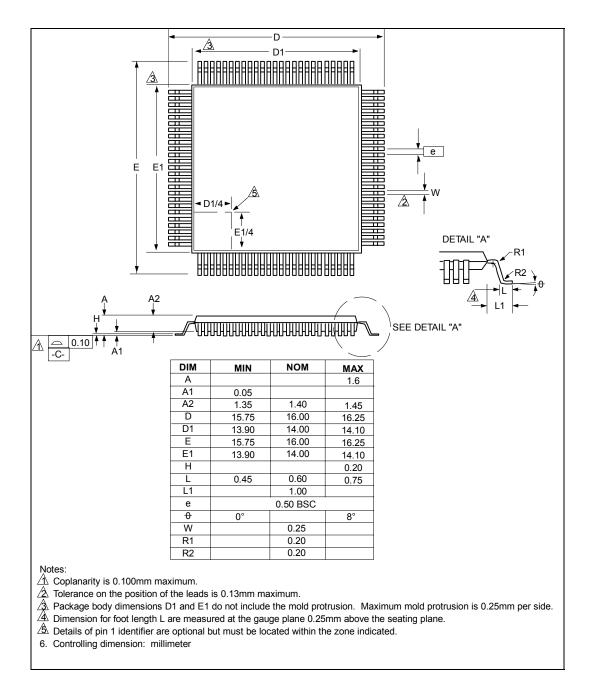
100 PIN TQFP PACKAGE OUTLINE
